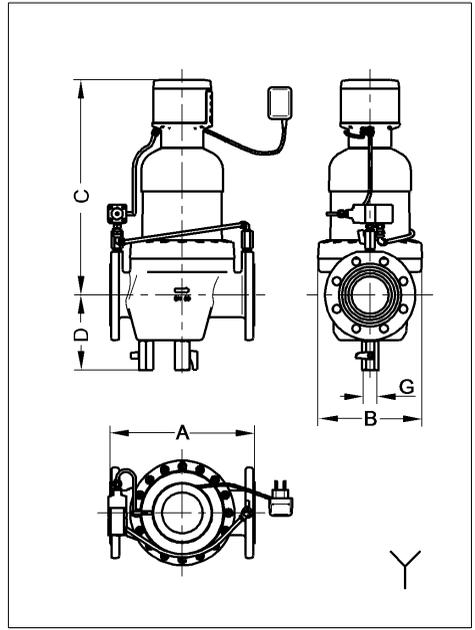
Installation dimensions JPF-A $2\frac{1}{2}$ " - 4"
